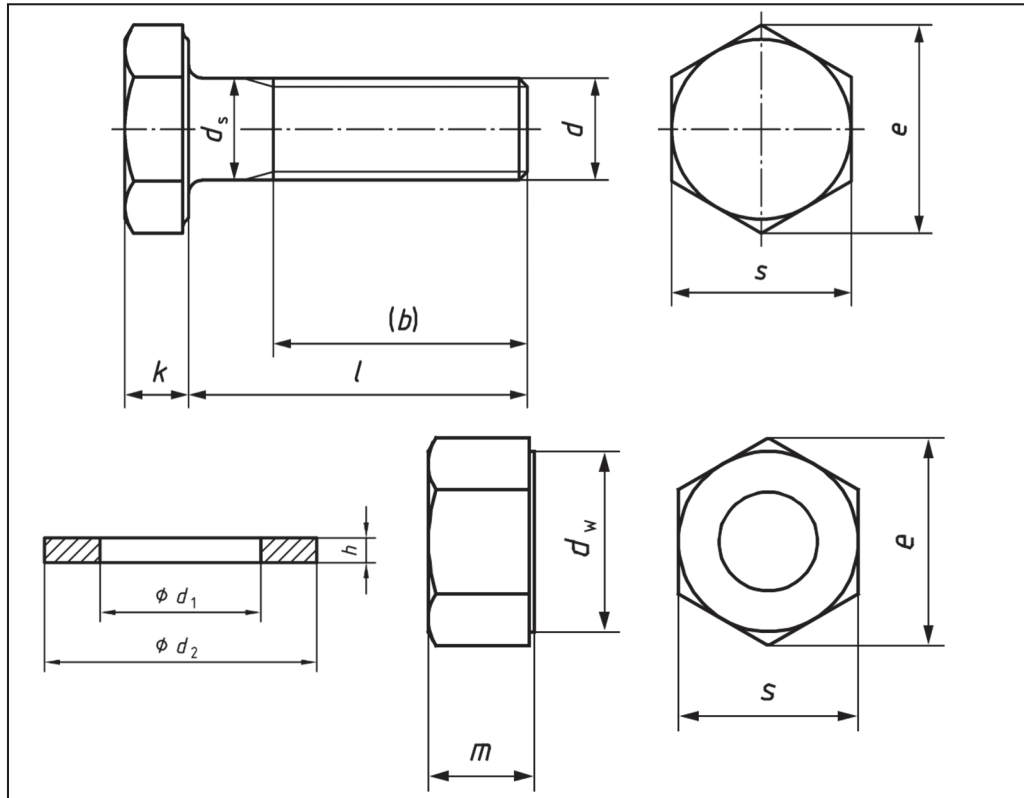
General dimensions of bolts, nuts and washers (Andrews Fasteners Ltd)
